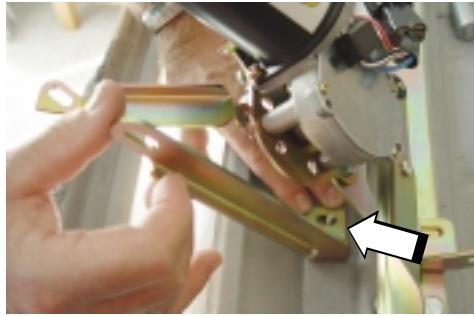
This photo illustrates how the Motor Brace, Windshield Brace Mounting Bracket and Cover Plate share the same mounting point.
